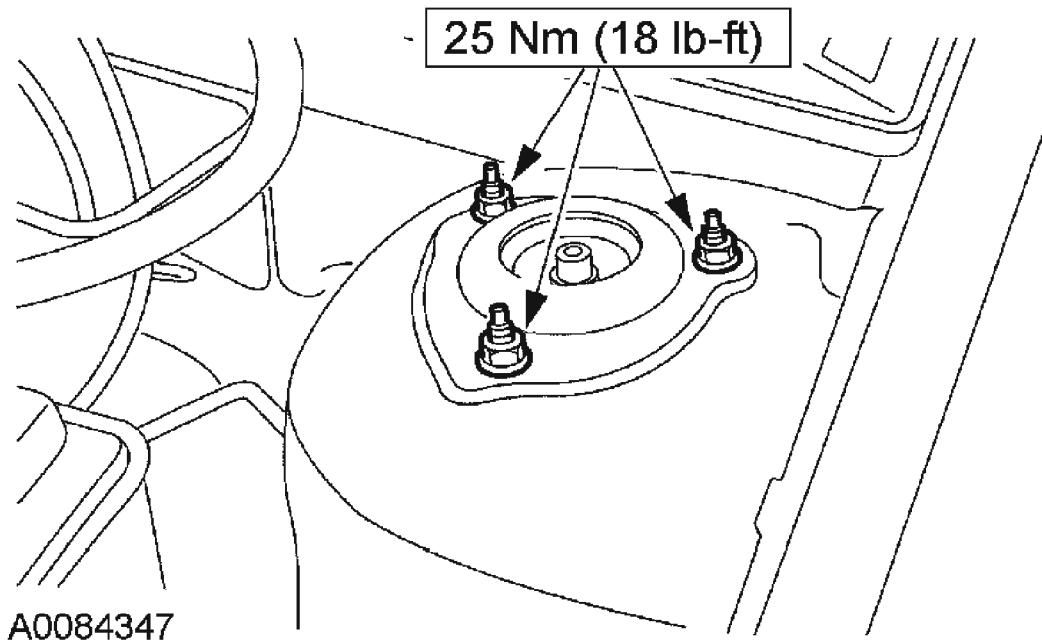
Tightening LH Strut And Spring Assembly Top Mount Nuts
